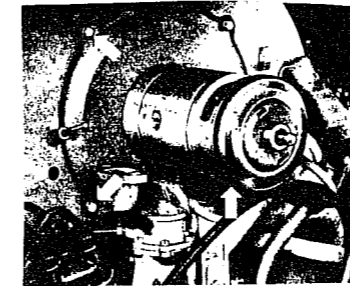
Location of the screws securing the generator and fan assembly to the fan housing.
